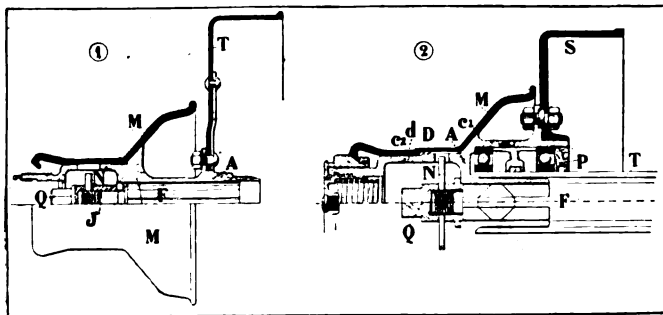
Mounting of the fixed hubs in R.A.F. demountable wire wheels on different wheel-driving shafts—(1) on a non-floating type of shaft—(2) on a full-floating type of shaft
